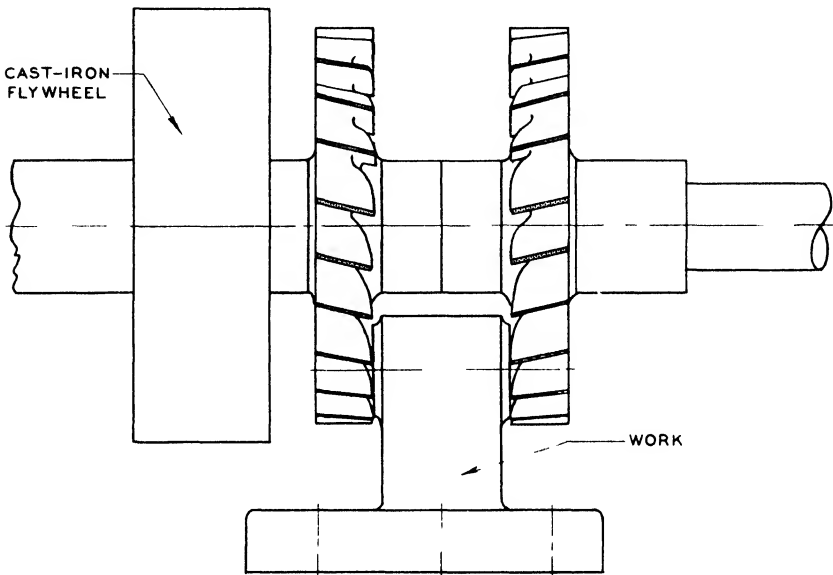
Straddle Milling, Using a Cast-Iron Flywheel
